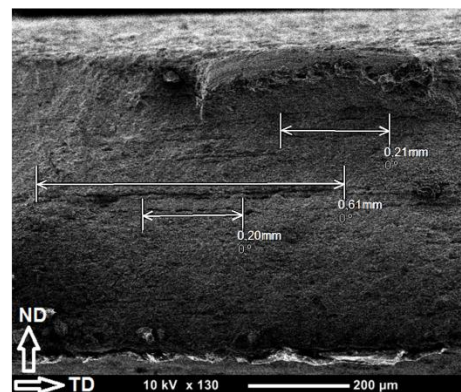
Fracture surface of specimen in Fig. 3(a).
